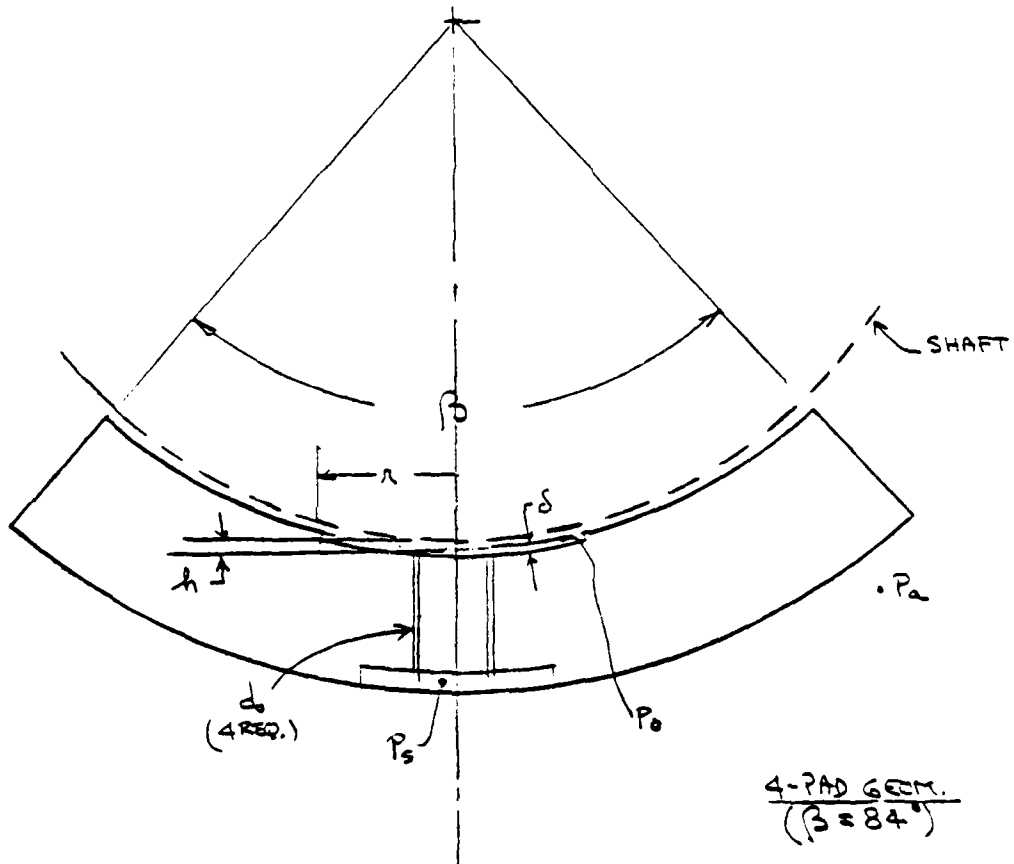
Hydrostatic Journal Bearing (Basic Pad Geometry)
